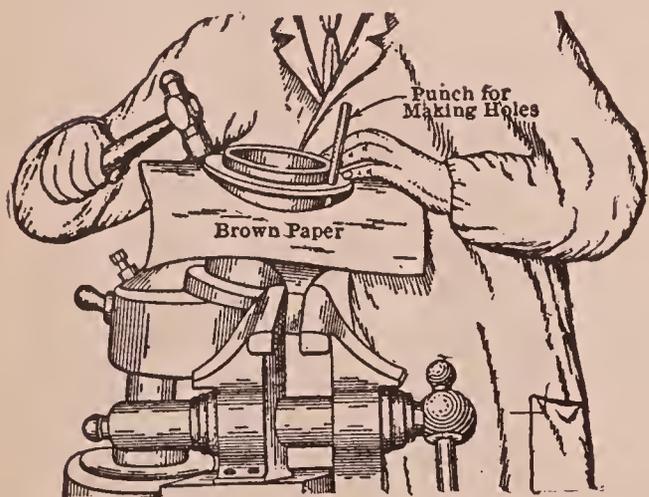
A method of making gaskets from heavy paper with no other tools than a hammer and a punch.
